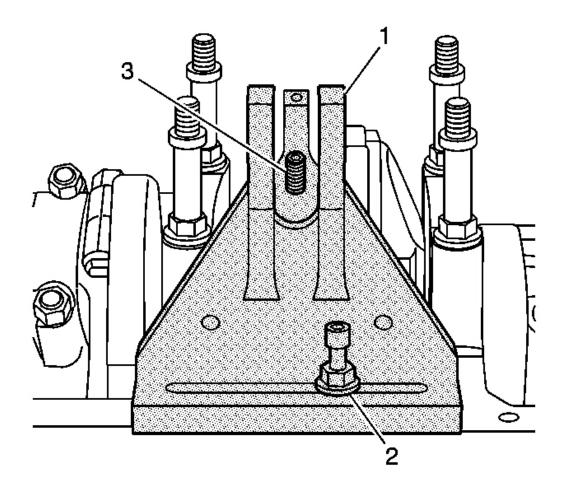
Aligning Center Of Base W/Pivot Arm Assembly Screw Courtesy of GENERAL MOTORS CORP.
